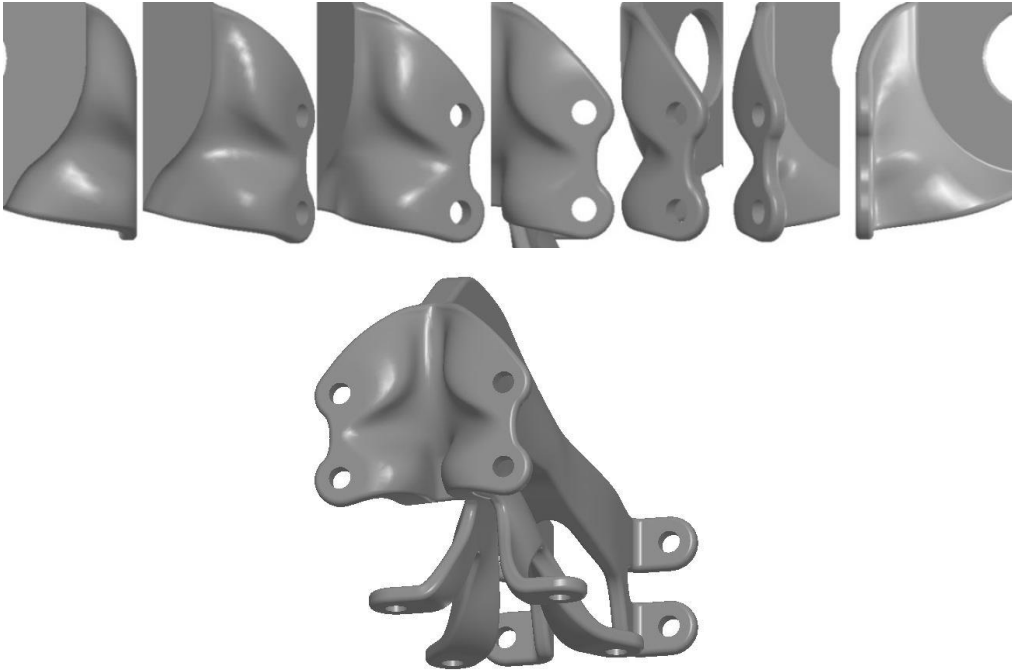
180° degree view on one half of the top rivets surface. Isometric view of the same region.
